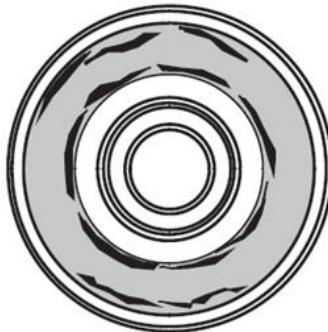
Example of Not Acceptable Cracks in Rubber Bushings
